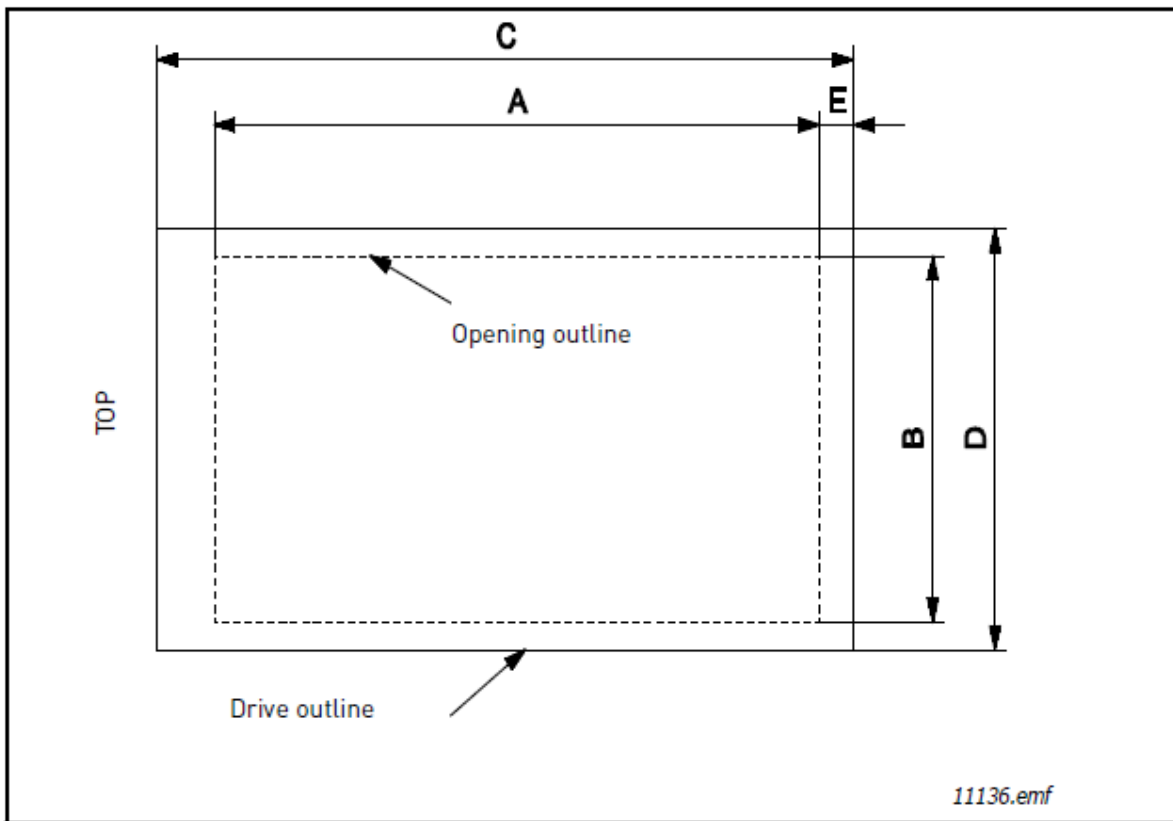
Flange mount cutout dimensions for MR4 to MR9
